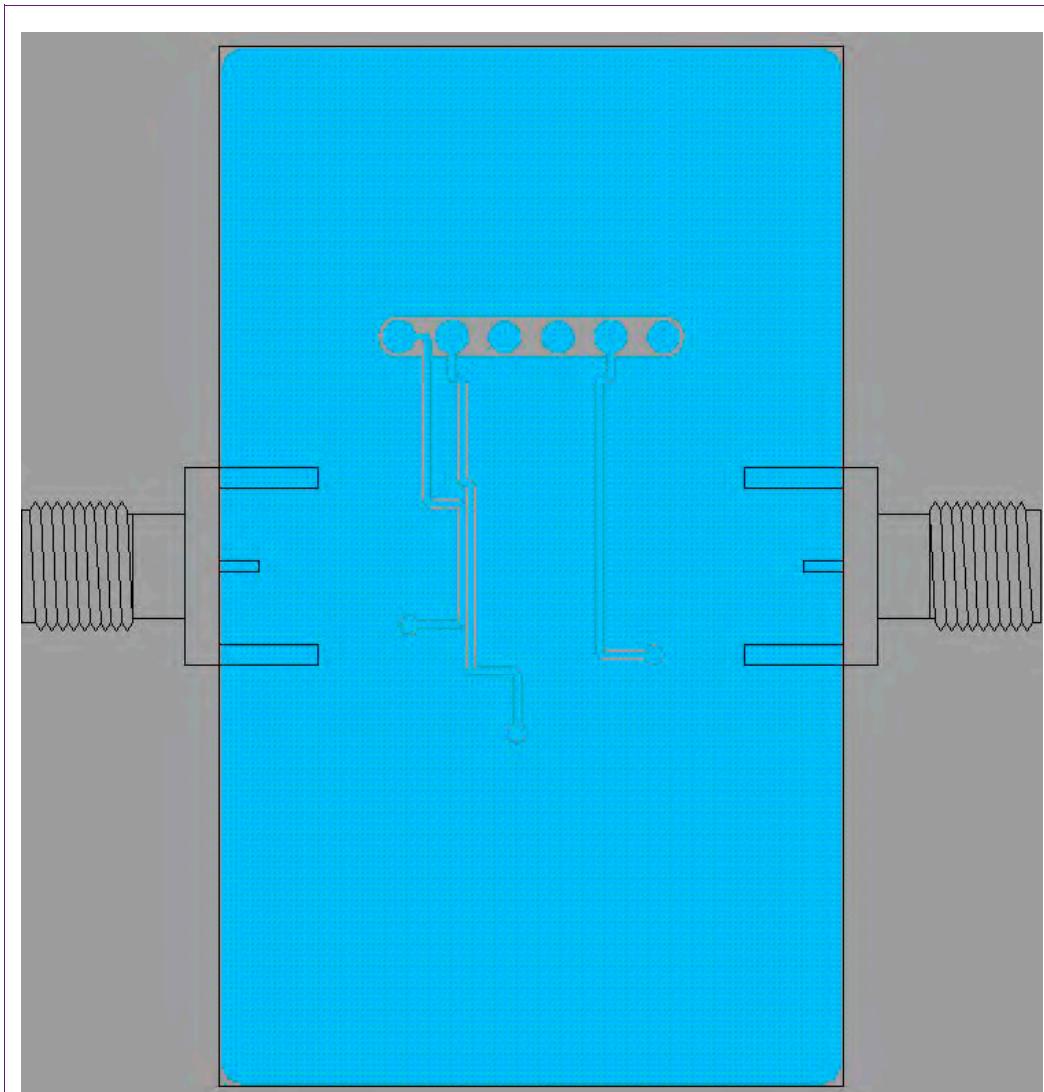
BGU706x Evaluation board bottom layer PCB layout
